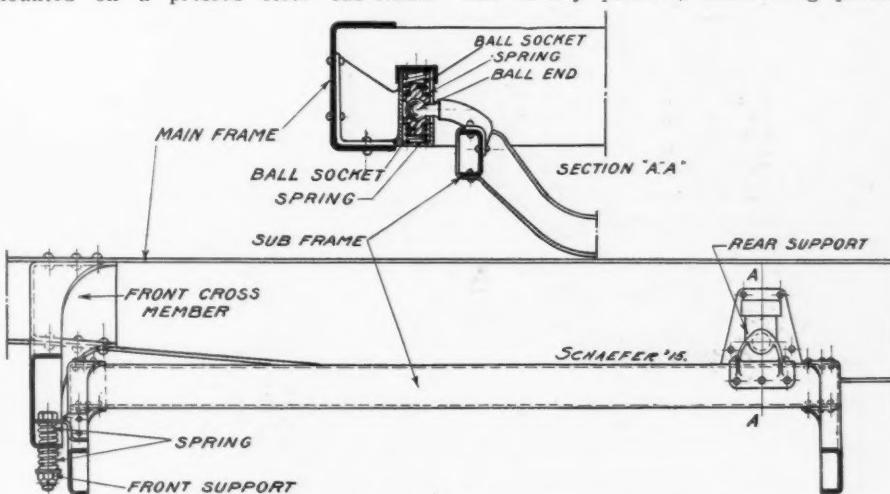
KisselKar Six-Ton Subframe Mounting
